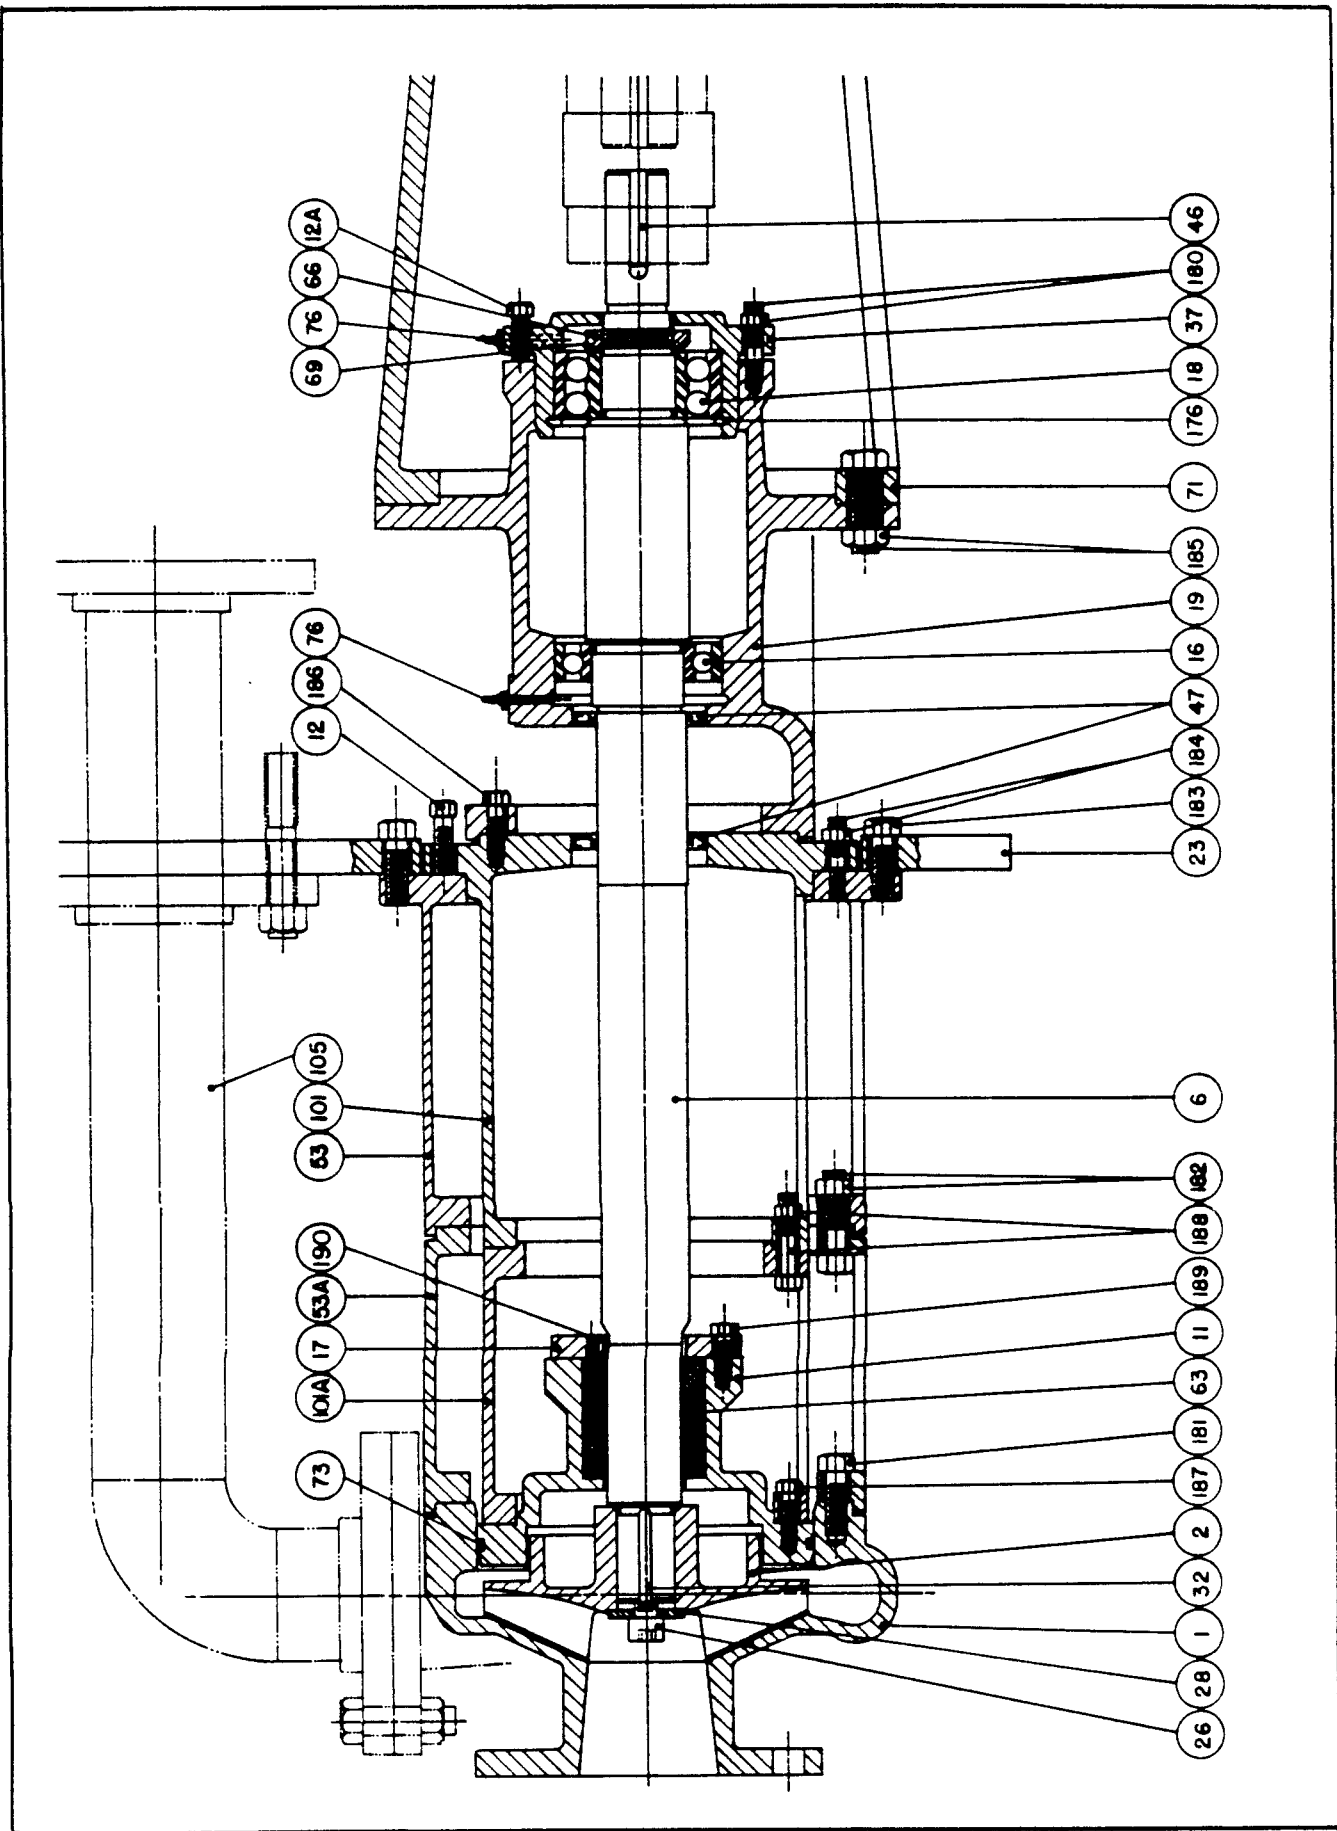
SECTIONAL ASSEMBLY DIAGRAM (OPEN IMPELLER)
